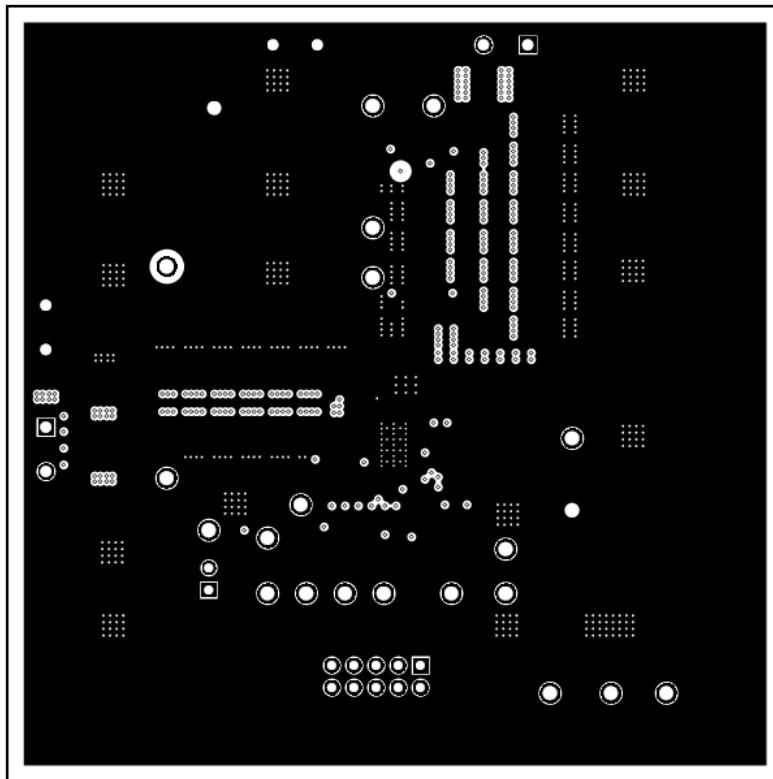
PWR-784EVM Inner Layer 4 (Top View)
